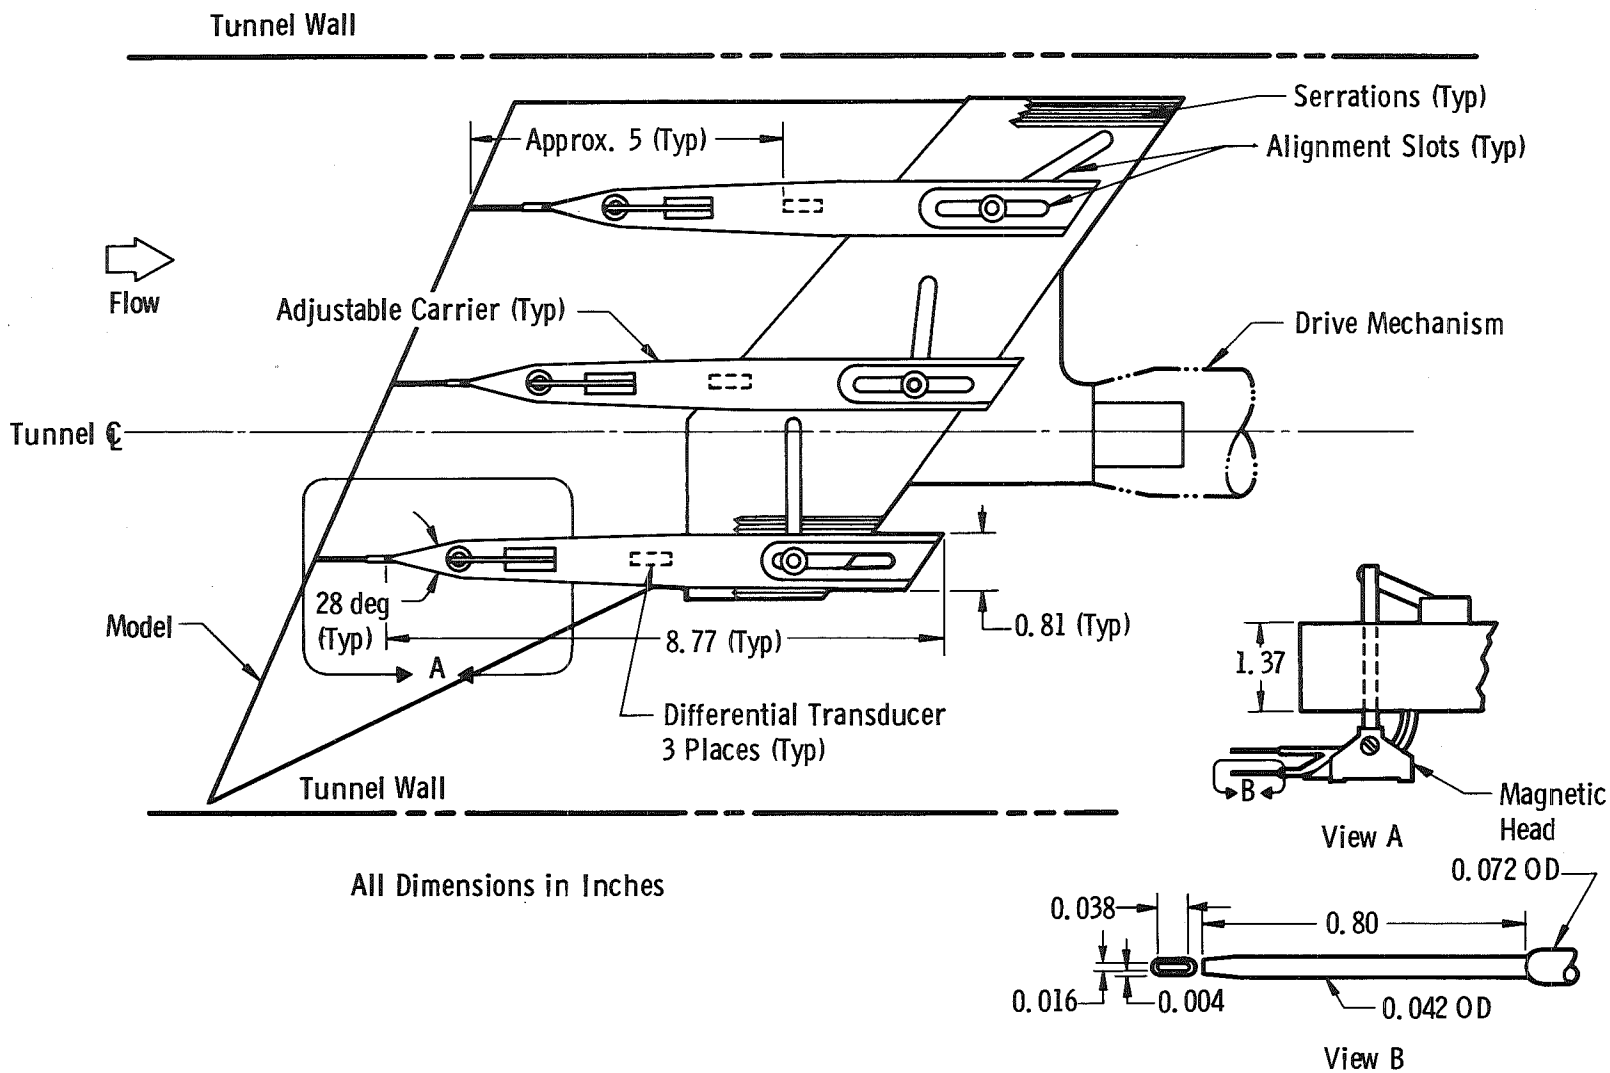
Sketch of Boundary-Layer Probe Assembly
